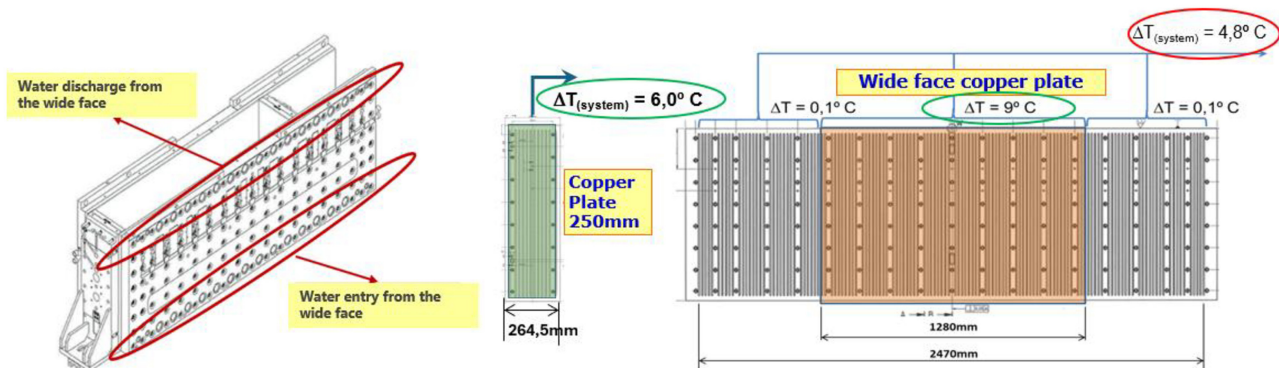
Primary cooling scheme showing wide and narrow mould faces.
